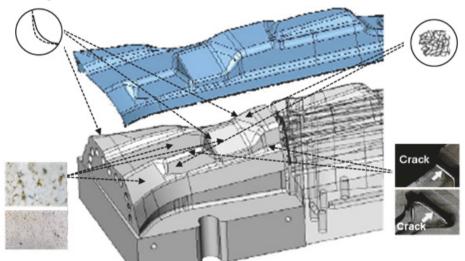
Illustration of failure modes and positions of hot stamping molds
